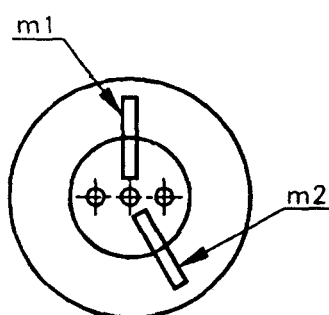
CONTAINERS WITH LONGITUDINAL AND CIRCUMFERENTIAL WELDS, LOCATION OF TEST PIECES
